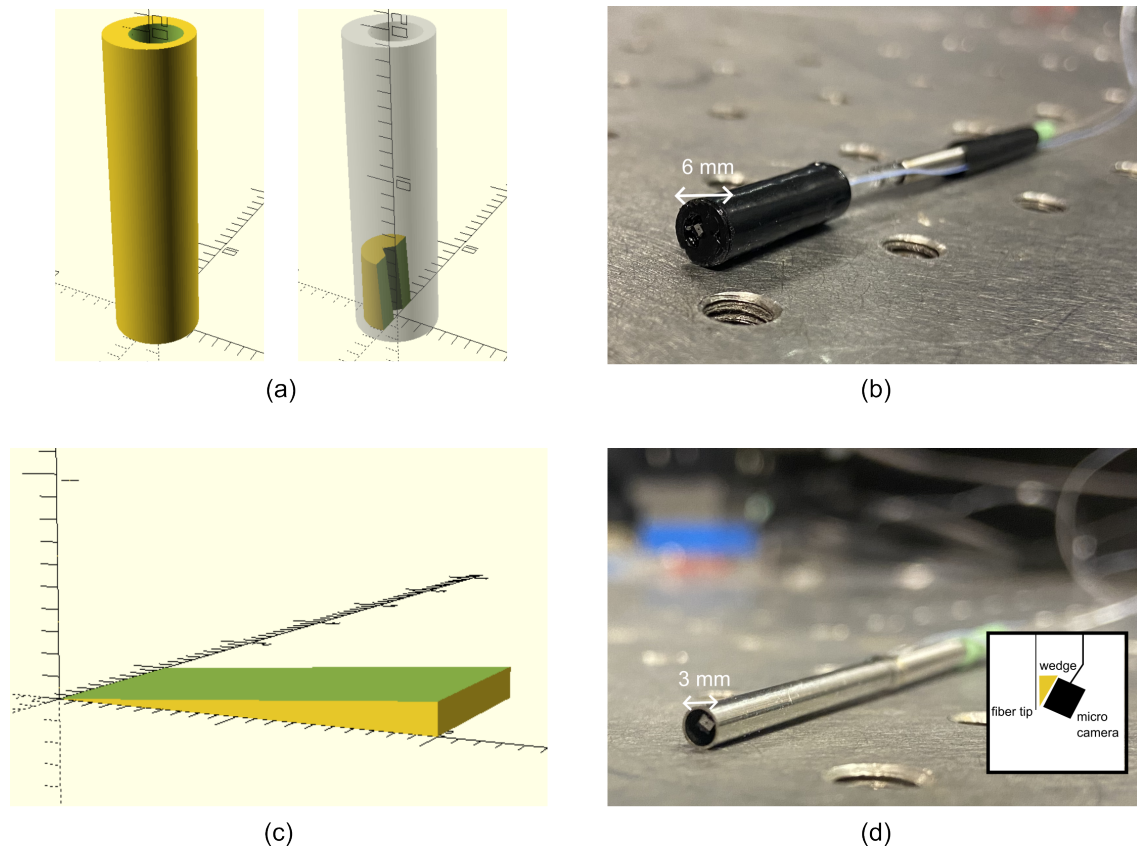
Development of prototype ultra-miniature SFDI device (a) *OpenSCAD* drawing of 6 mm diameter, 20 mm height prototype casing with angled camera holder at base (b) image of initial prototype cased in 3D printed housing (c) *OpenSCAD* drawing of 2 mm height wedge at 4° angle camera from fiber tip (d) image of final prototype in 3 mm diameter stainless steel housing with inset showing schematic of fiber tip, wedge, and micro camera.
